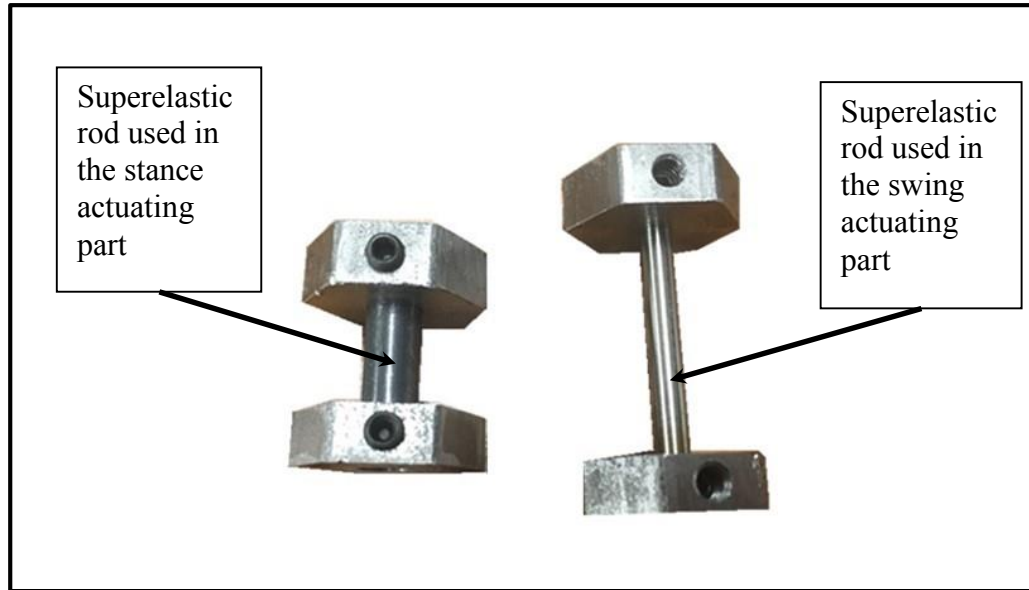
The Two NiTi#1 Superelastic Rods Assembled with the Alloy Fixtures.
